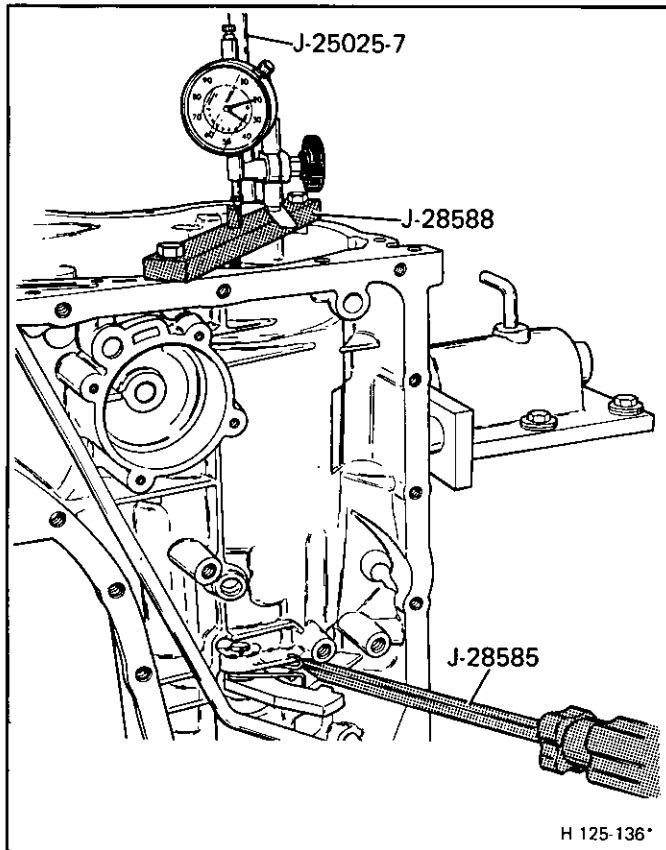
Lo Roller Clutch Race Selective Thrust Spacer
